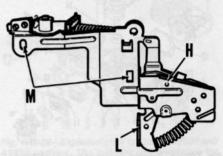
Push against lever (L) and insert a pin through holes (H) to hold brake pad away from flywheel.
